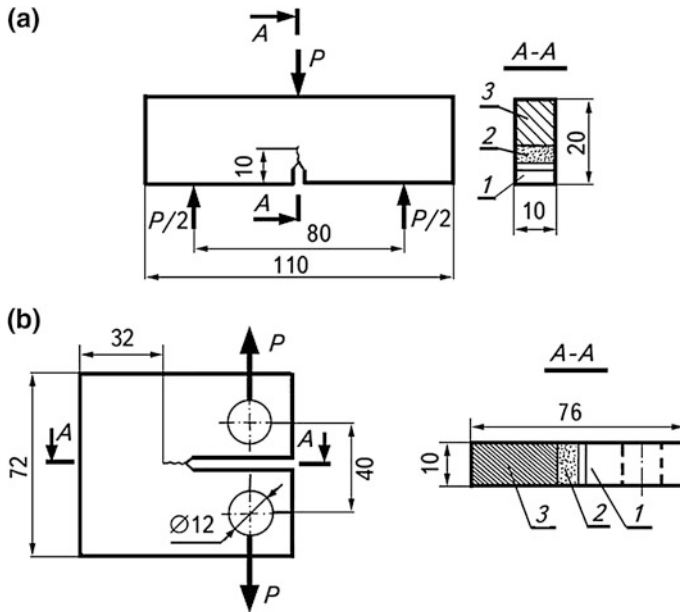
Prismatic (a) and compact (b) testing specimens: 1 is notch, 2 is fatigue crack, 3 is specimen body
